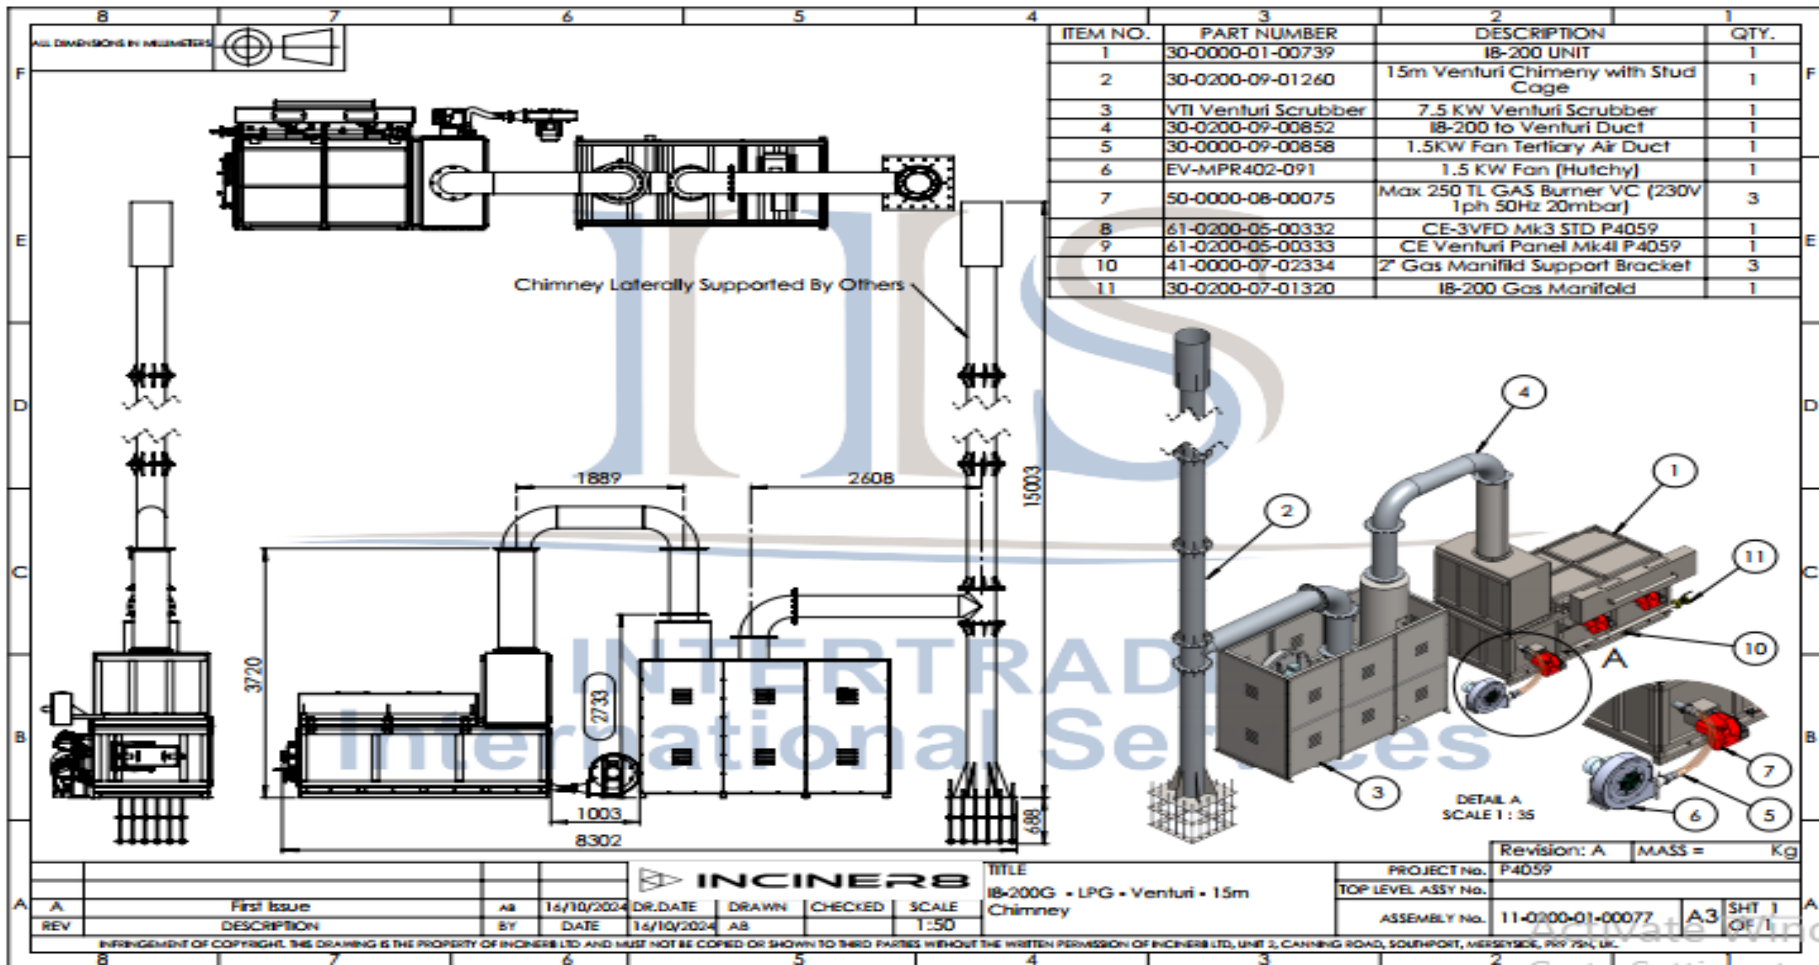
Proposed Plan layout of Incinerator i8-200G
